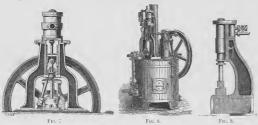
A Three-borse power Portable Engine, upon an improved vertical-flued boiler of 4 horse-power, con-structed of boiler plate welded and riveted, the interior being everywhere accessible by a man-hole for cleaning our. The boiler serves the purpose of foundation
